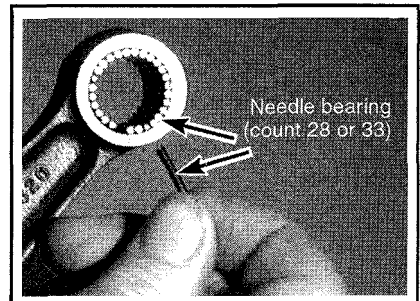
During assembly, carefully place the loose bearing needles in the wrist pin...
